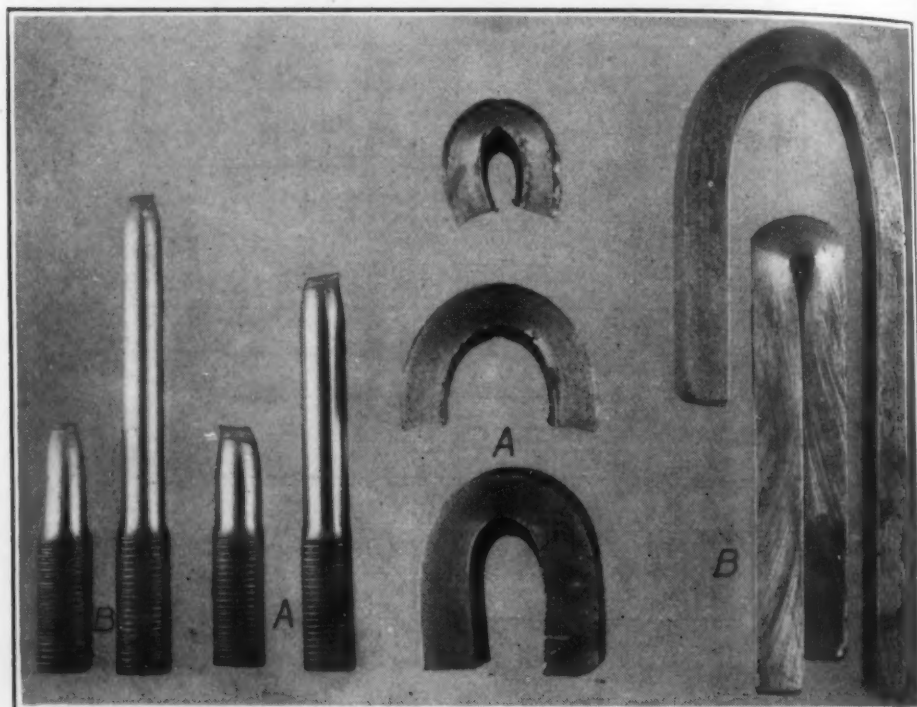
Photograph Showing Comparison of Tensile Test Specimen and Bend Test Specimen of Materials A and B. Note Weld Specimen in Upper Center.
